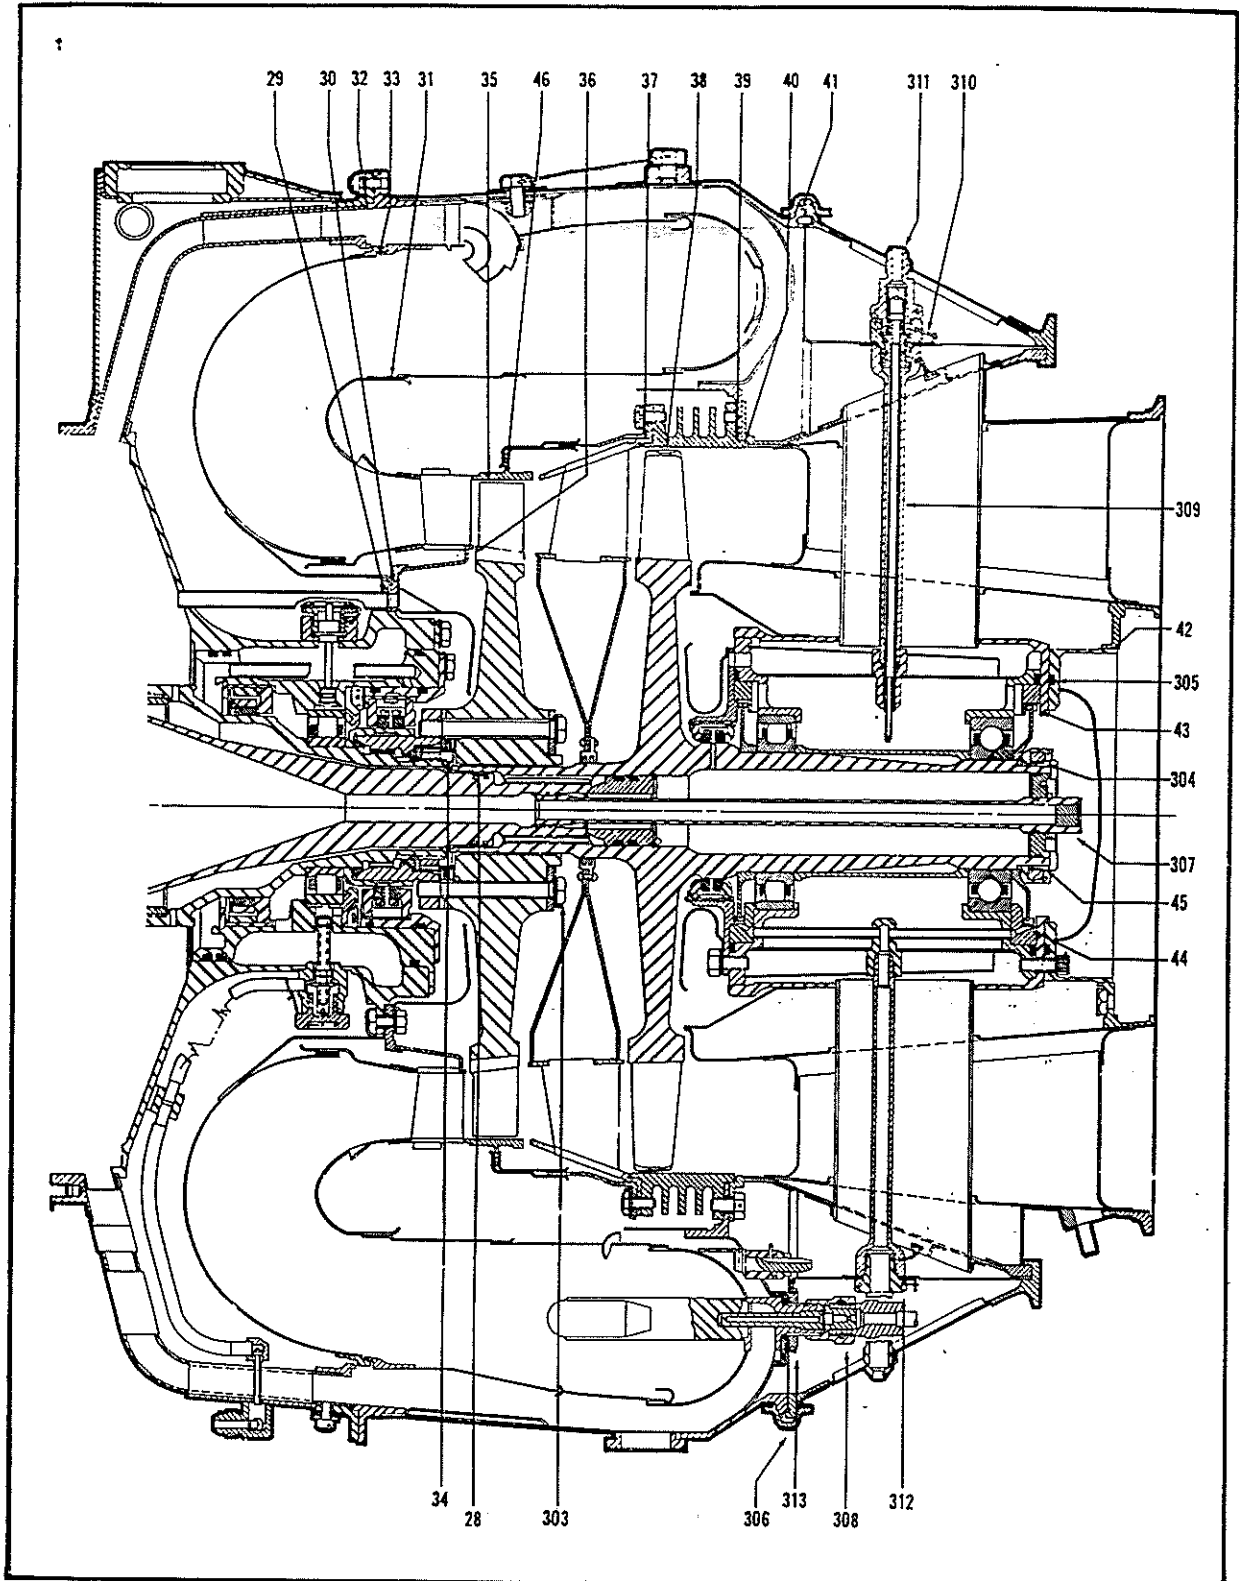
Diffuser, Combustion Chamber and Support Assembly
